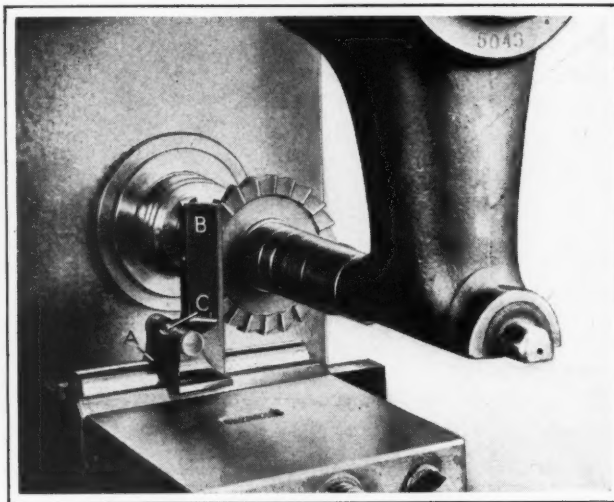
Locating Cylindrical Work Central with the Axis of a Milling Cutter
